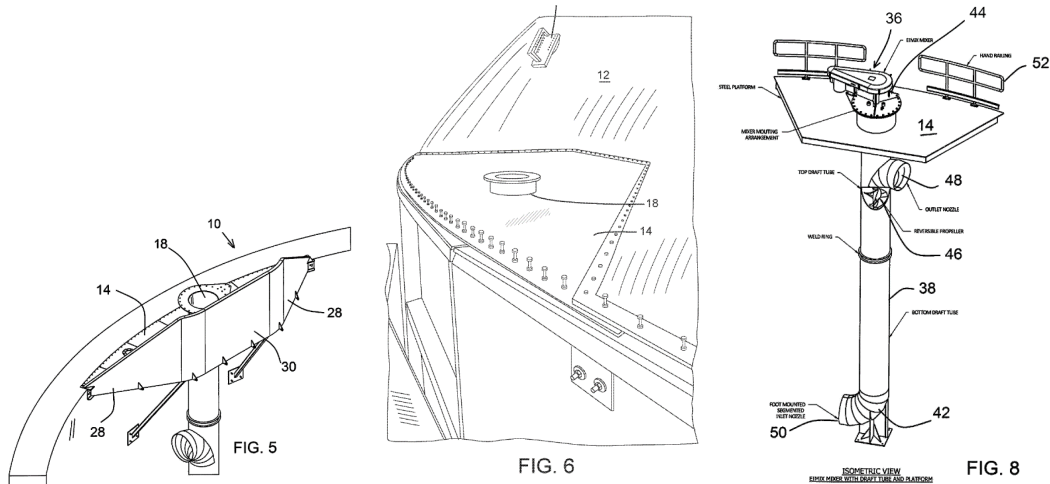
Draft Tube Mixer Design for Digesters with Membrane Covers
